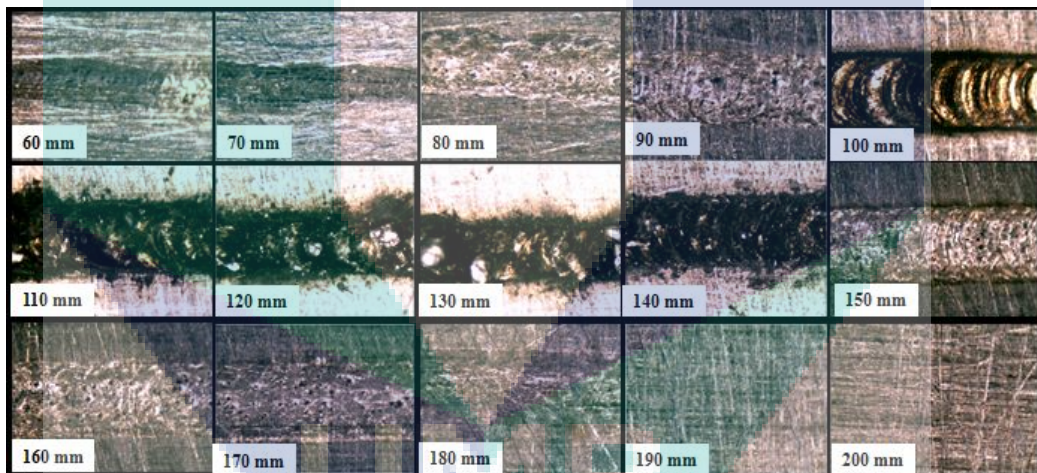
Weld line produced on sample surface (PW) with different focal length.
